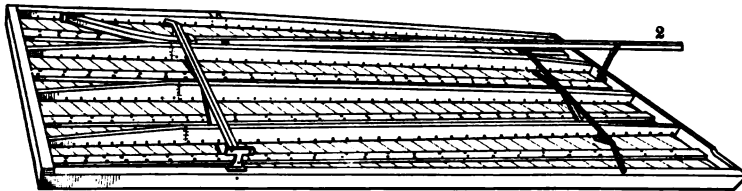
DECK CONSTRUCTION OF NO. 5 WILFLEY TABLE.
